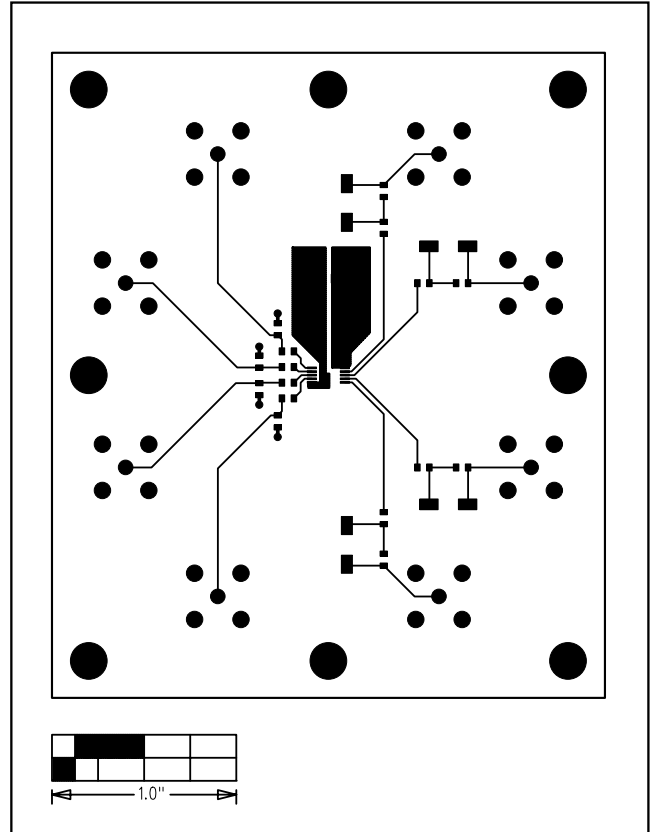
MAX9589 EV Kit PCB Layout—Component Side
